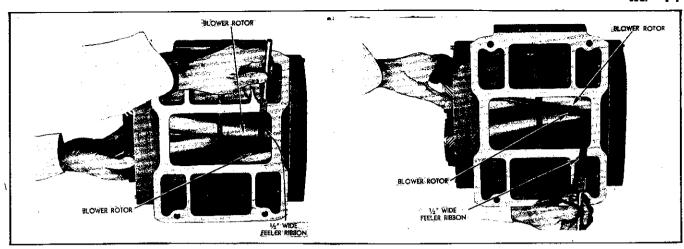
Measuring Clearance Between Blower Rotor Lobes.
